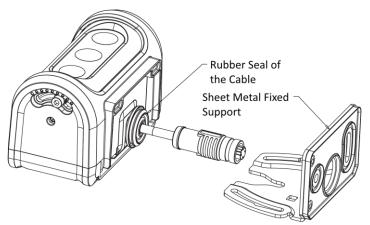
Take Off the Sheet Metal and Rubber Seal
